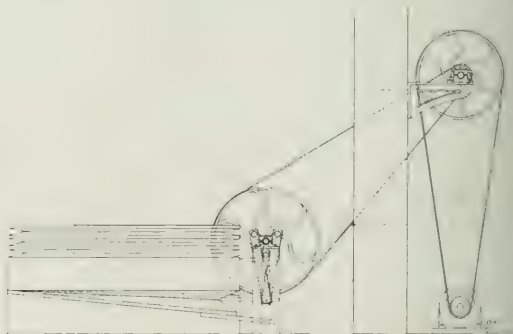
Blowing Arrangement used with A.C. Motors.
